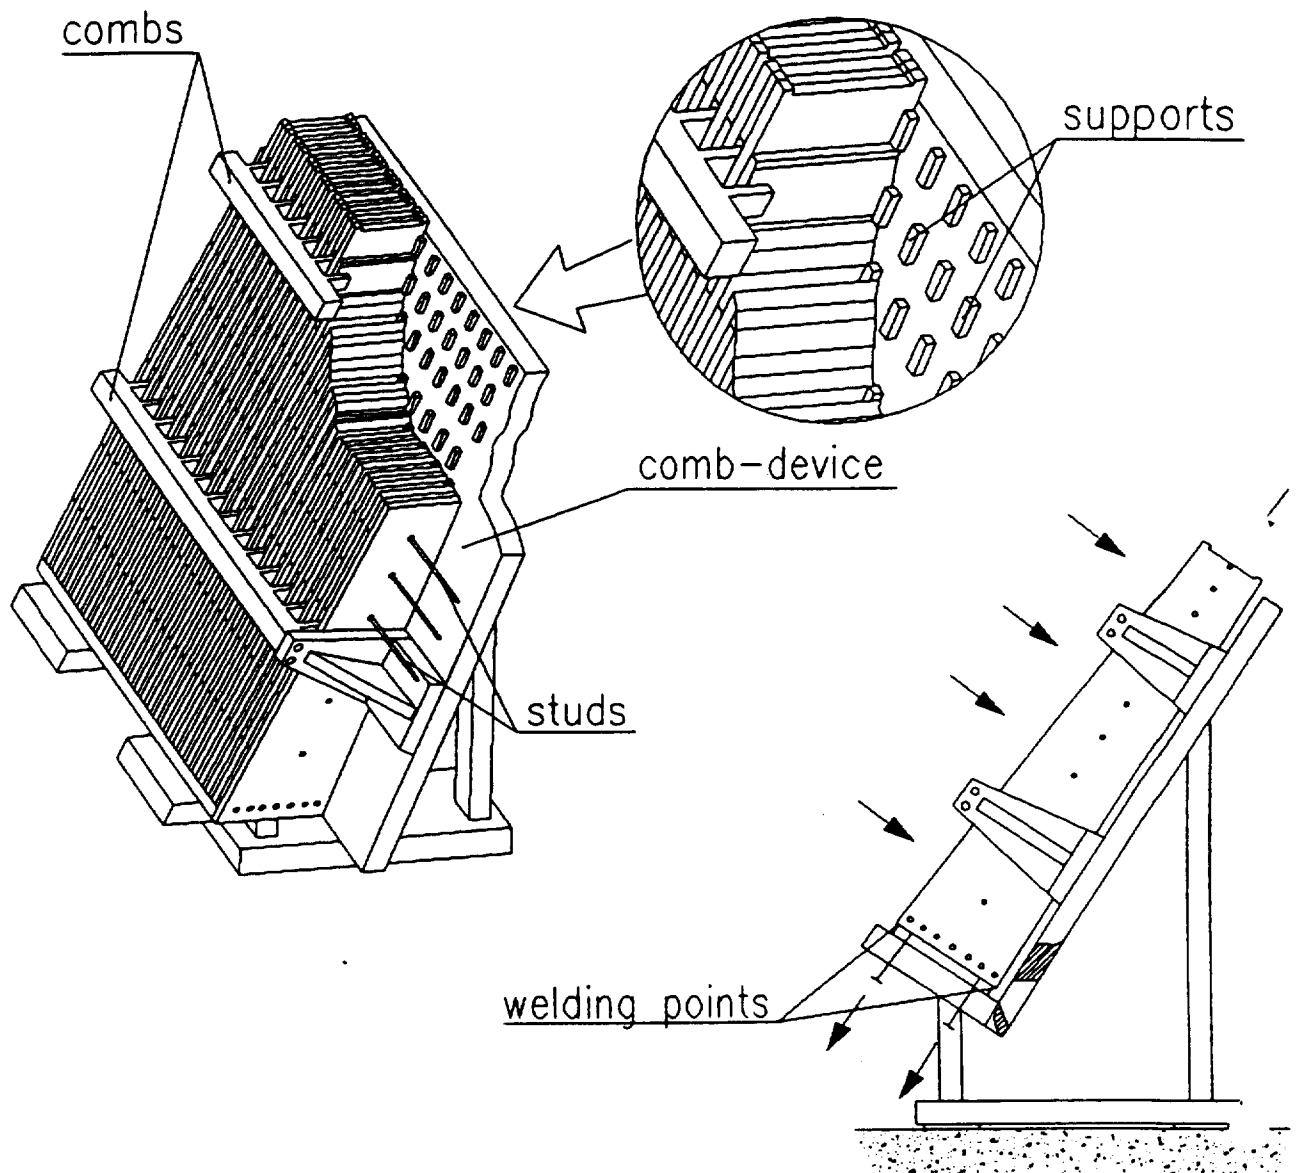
Packing of module, setting of studs, welding of plate, weld of module along inner radius.
